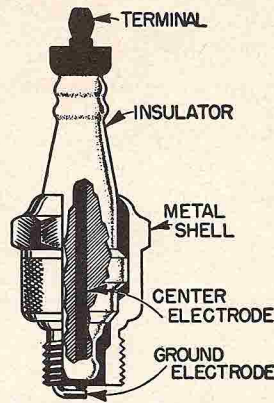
Cross sectional view of spark plug showing construction and nomenclature.
